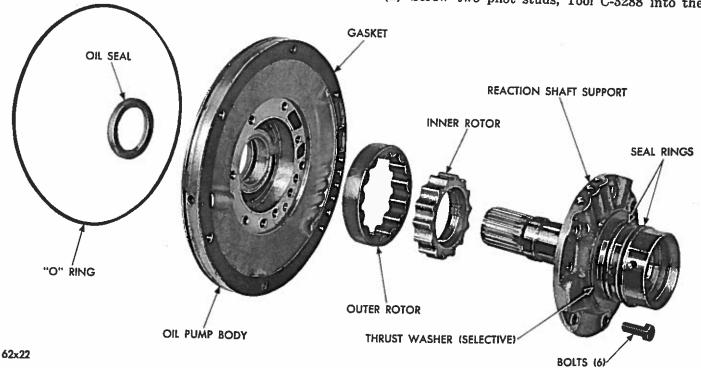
Front Oil Pump and Reaction Shaft Support (Exploded View)
